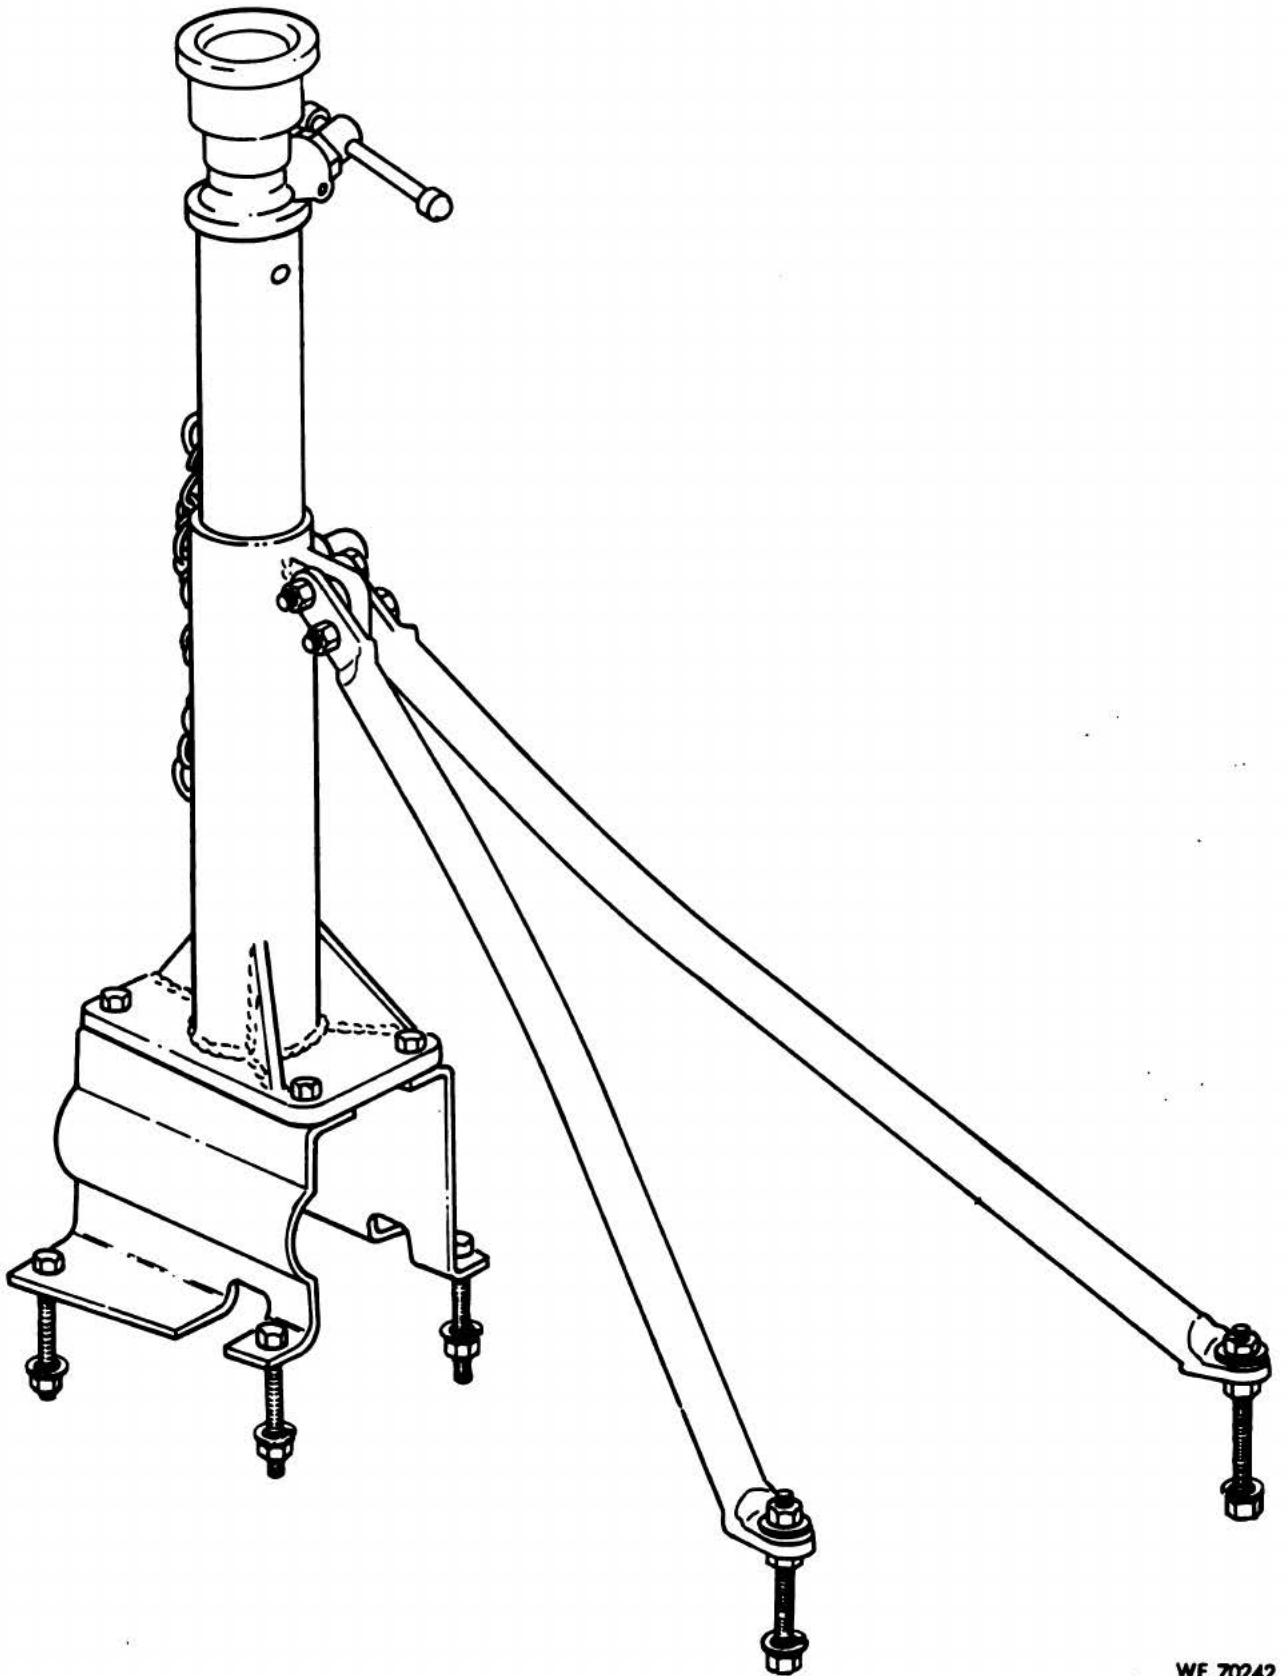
Mount, machine gun — 6540733 — right front view.
